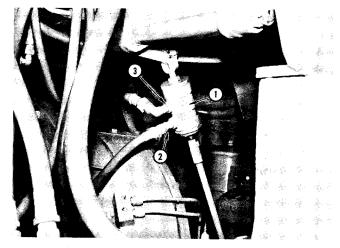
RELEASE VALVE (WAGNER) 1. Clutch Valve 3. Air Outlet 2. Air Inlet
